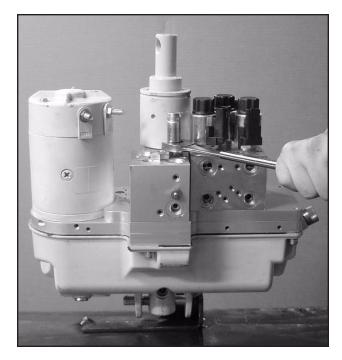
The "S2" Cartridge is removed using a 7/8" wrench or deep well socket.
